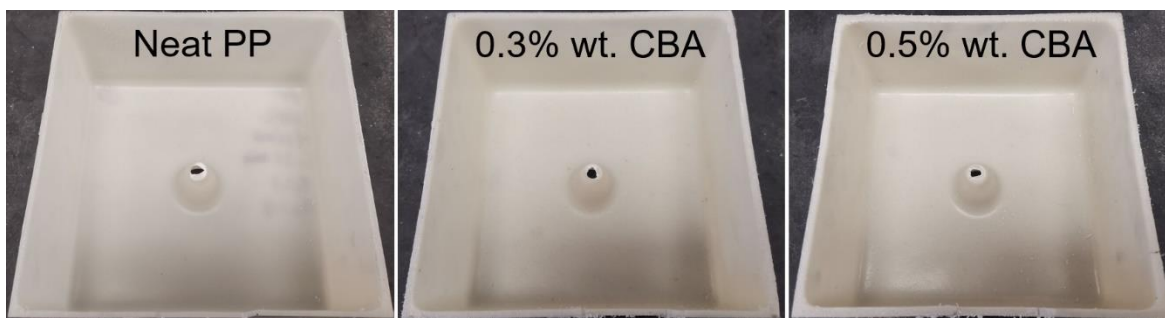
Typical examples of the rotomolded PP parts (cut samples).
